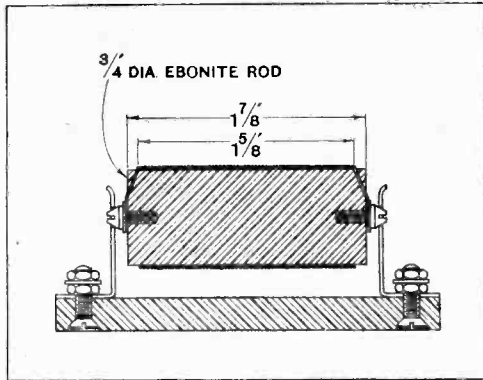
Sectional sketch of the H.F. choke coil and its base.
